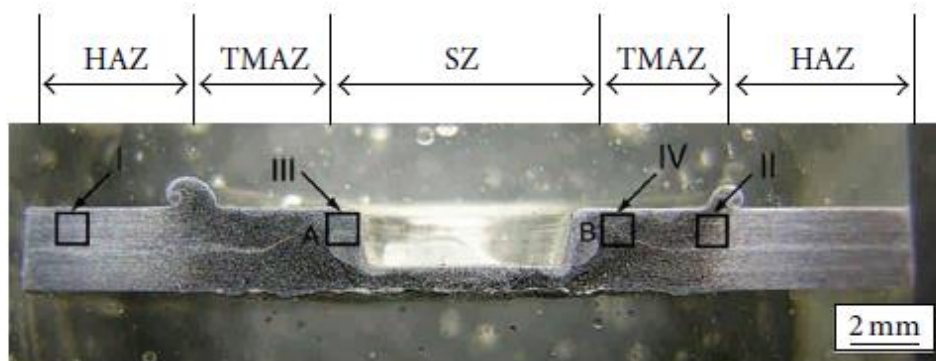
A typical micrograph of the friction stir weld cross-section in the welding direction [4]
